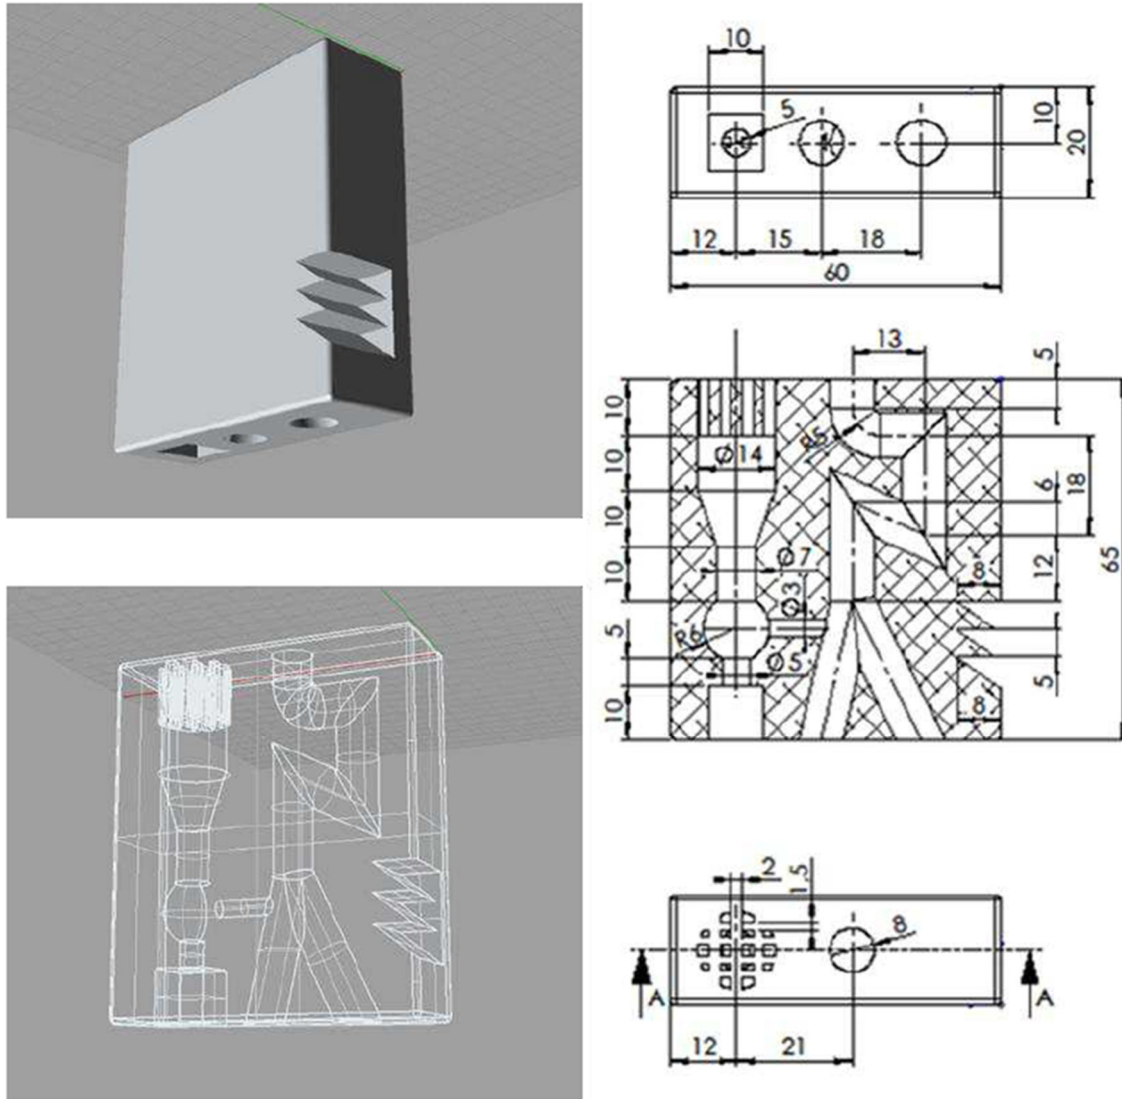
Engineering definition of the test part used for the research work. Pictures courtesy of Idonial [3].
